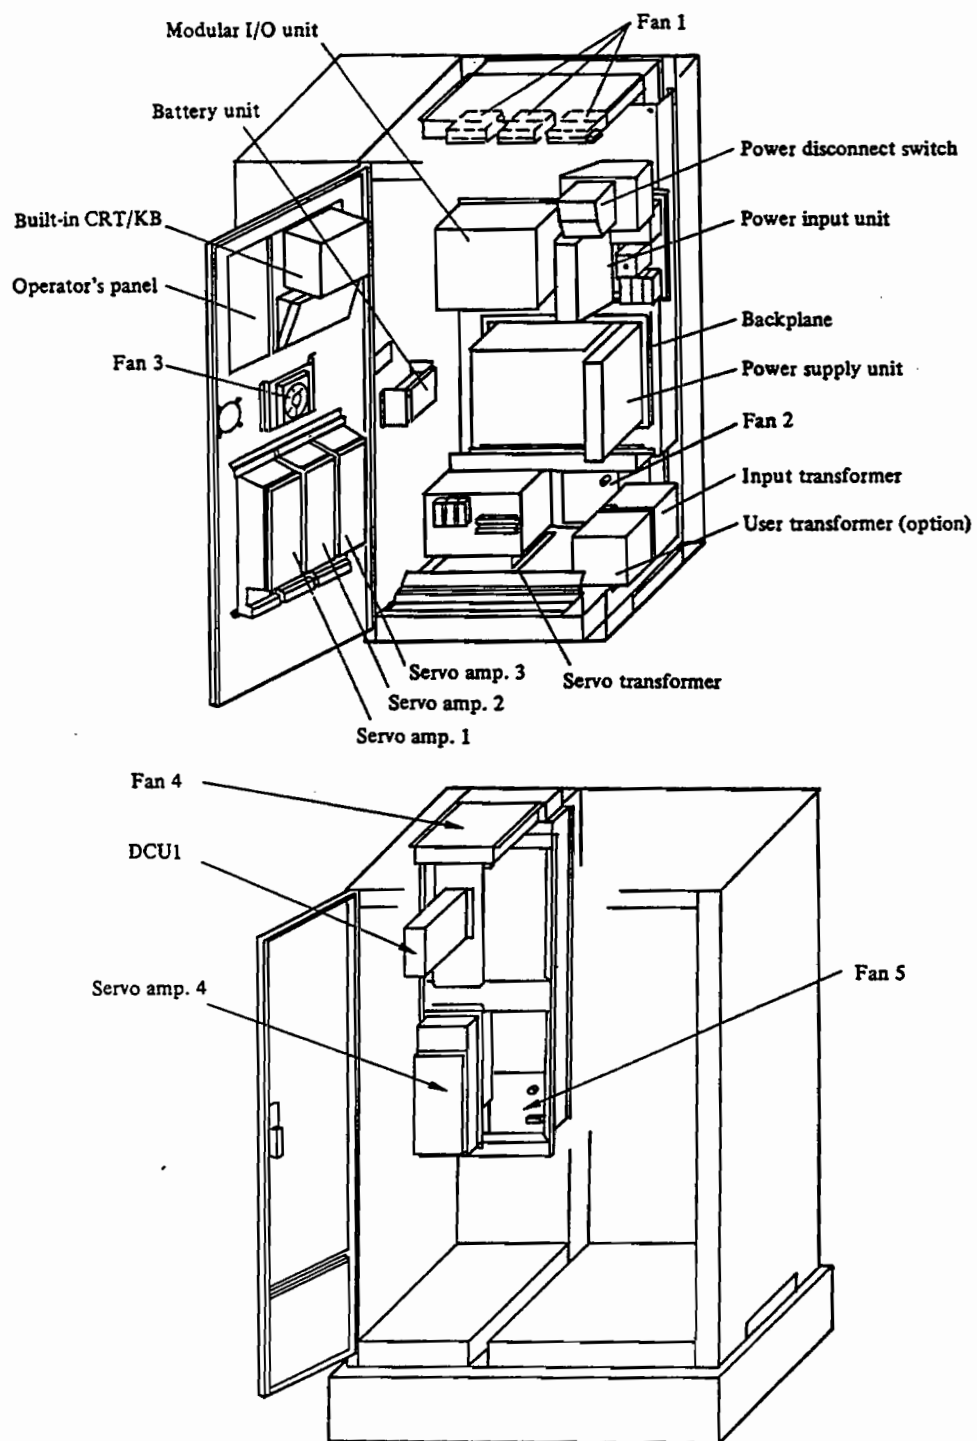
(c) Internal components location (S-700, large size cabinet and side cabinet)
